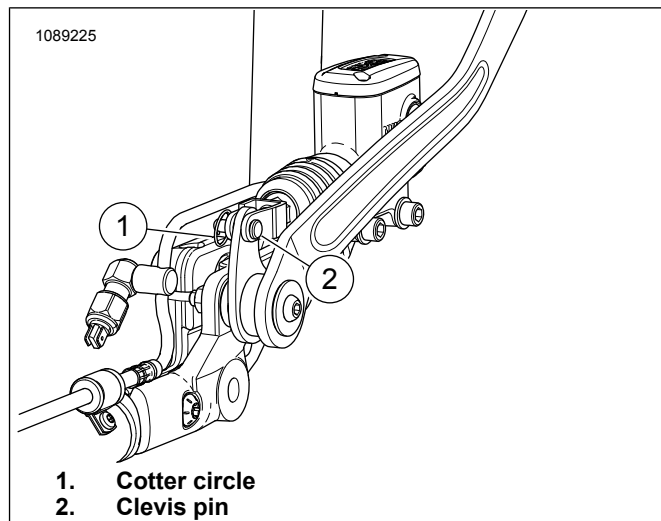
Rear Master Cylinder - Rear View: (exhaust remove for clarity)
